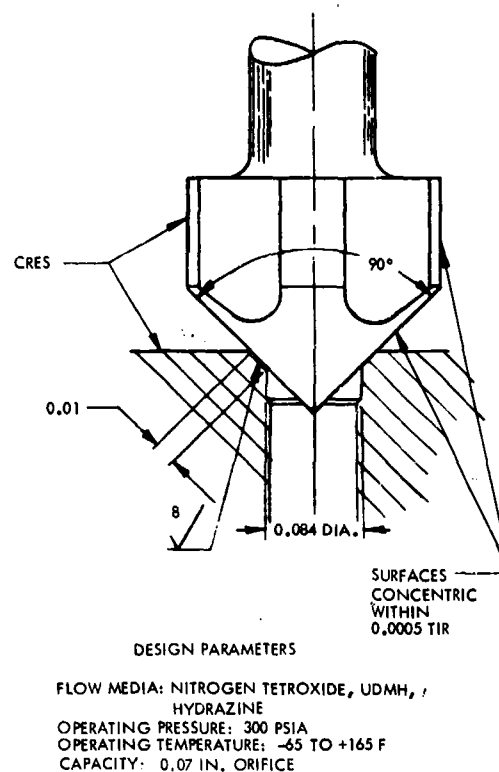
Hard Conical Poppet Seat Design for Propellant Solenoid Valve
